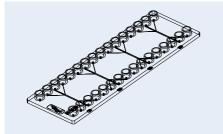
Schematic drawing particle & cell sorter – Fl. 0386
